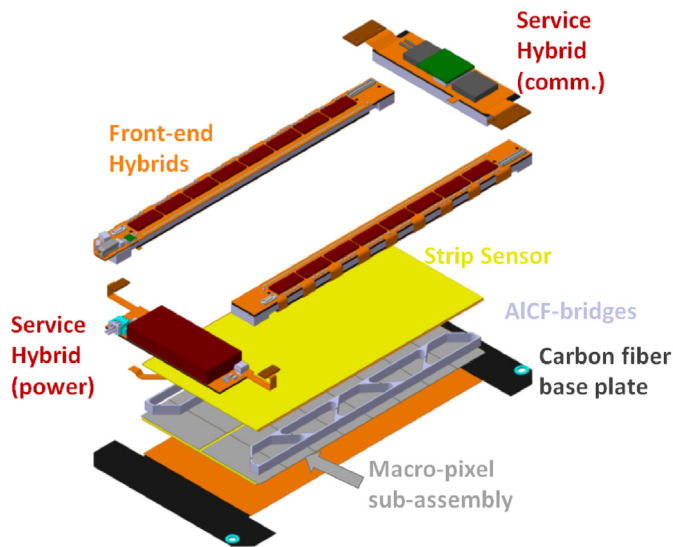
Drawing of the PS module type. Shown is the exploded view of parts as they need to be assembled at the module assembly sites. The macro-pixel sub-assembly is the bump-bonded entity of macro-pixel sensor and 16 MPA readout chips. Source: Adapted from [5].
